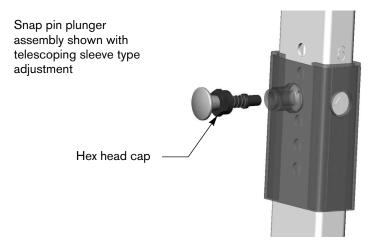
Inspect snap pins (snap pin shown in exploded view for clarity)
